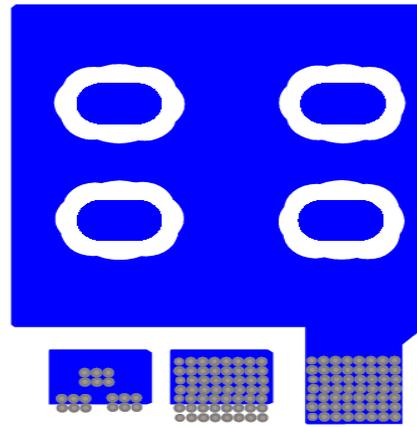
Bottom View of Bulk Cap Daughter Card PCB
